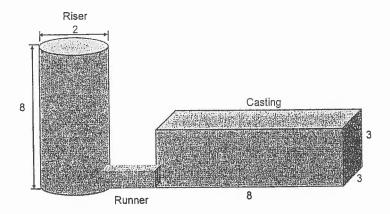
Schematic of a casting set-up showing the riser, runner and casting mould as well as the dimensions. Note: All dimensions are in cm
